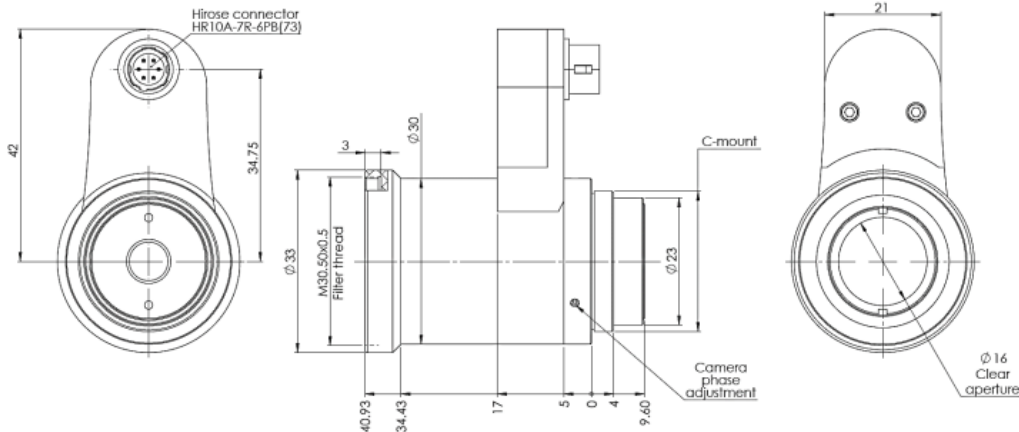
Mechanical drawing of the ELM-6-5.6-9-C electrical lens module
